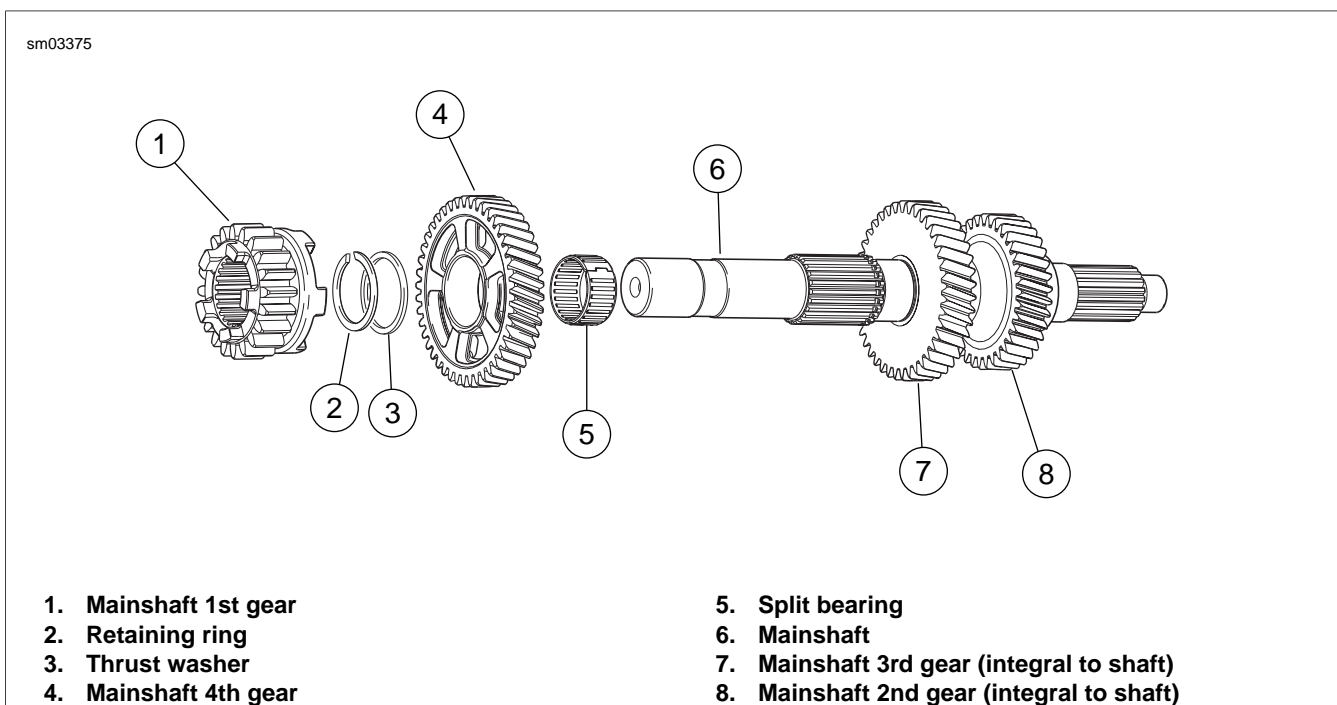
Transmission Mainshaft Assembly Once Removed from Left Crankcase/Disassembly
